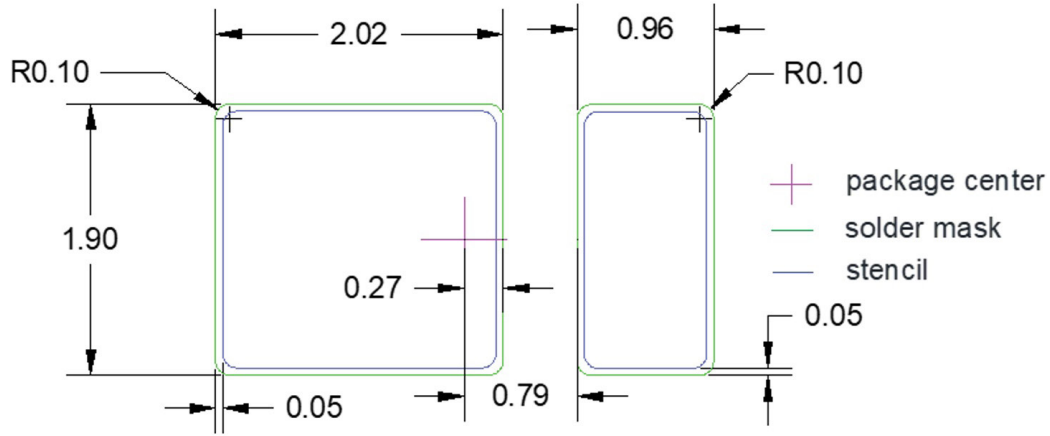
Recommended PCB solder pad layout for LUXEON 2835 Commercial.
